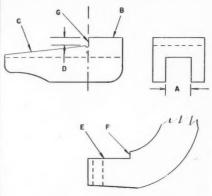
Drawing showing shape of tapered anvil for modified micrometer.
